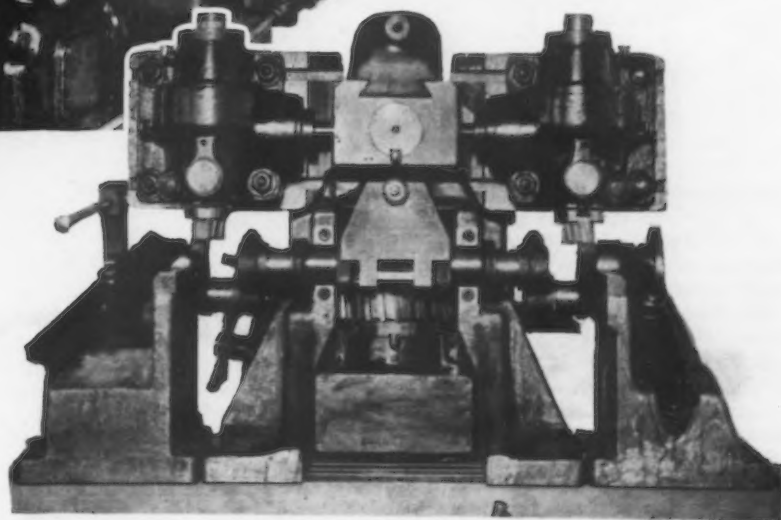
A Machine With Special Cutter Heads, Having Two Vertical Overhead Spindles and One Vertical Spindle Coming Up From Below
